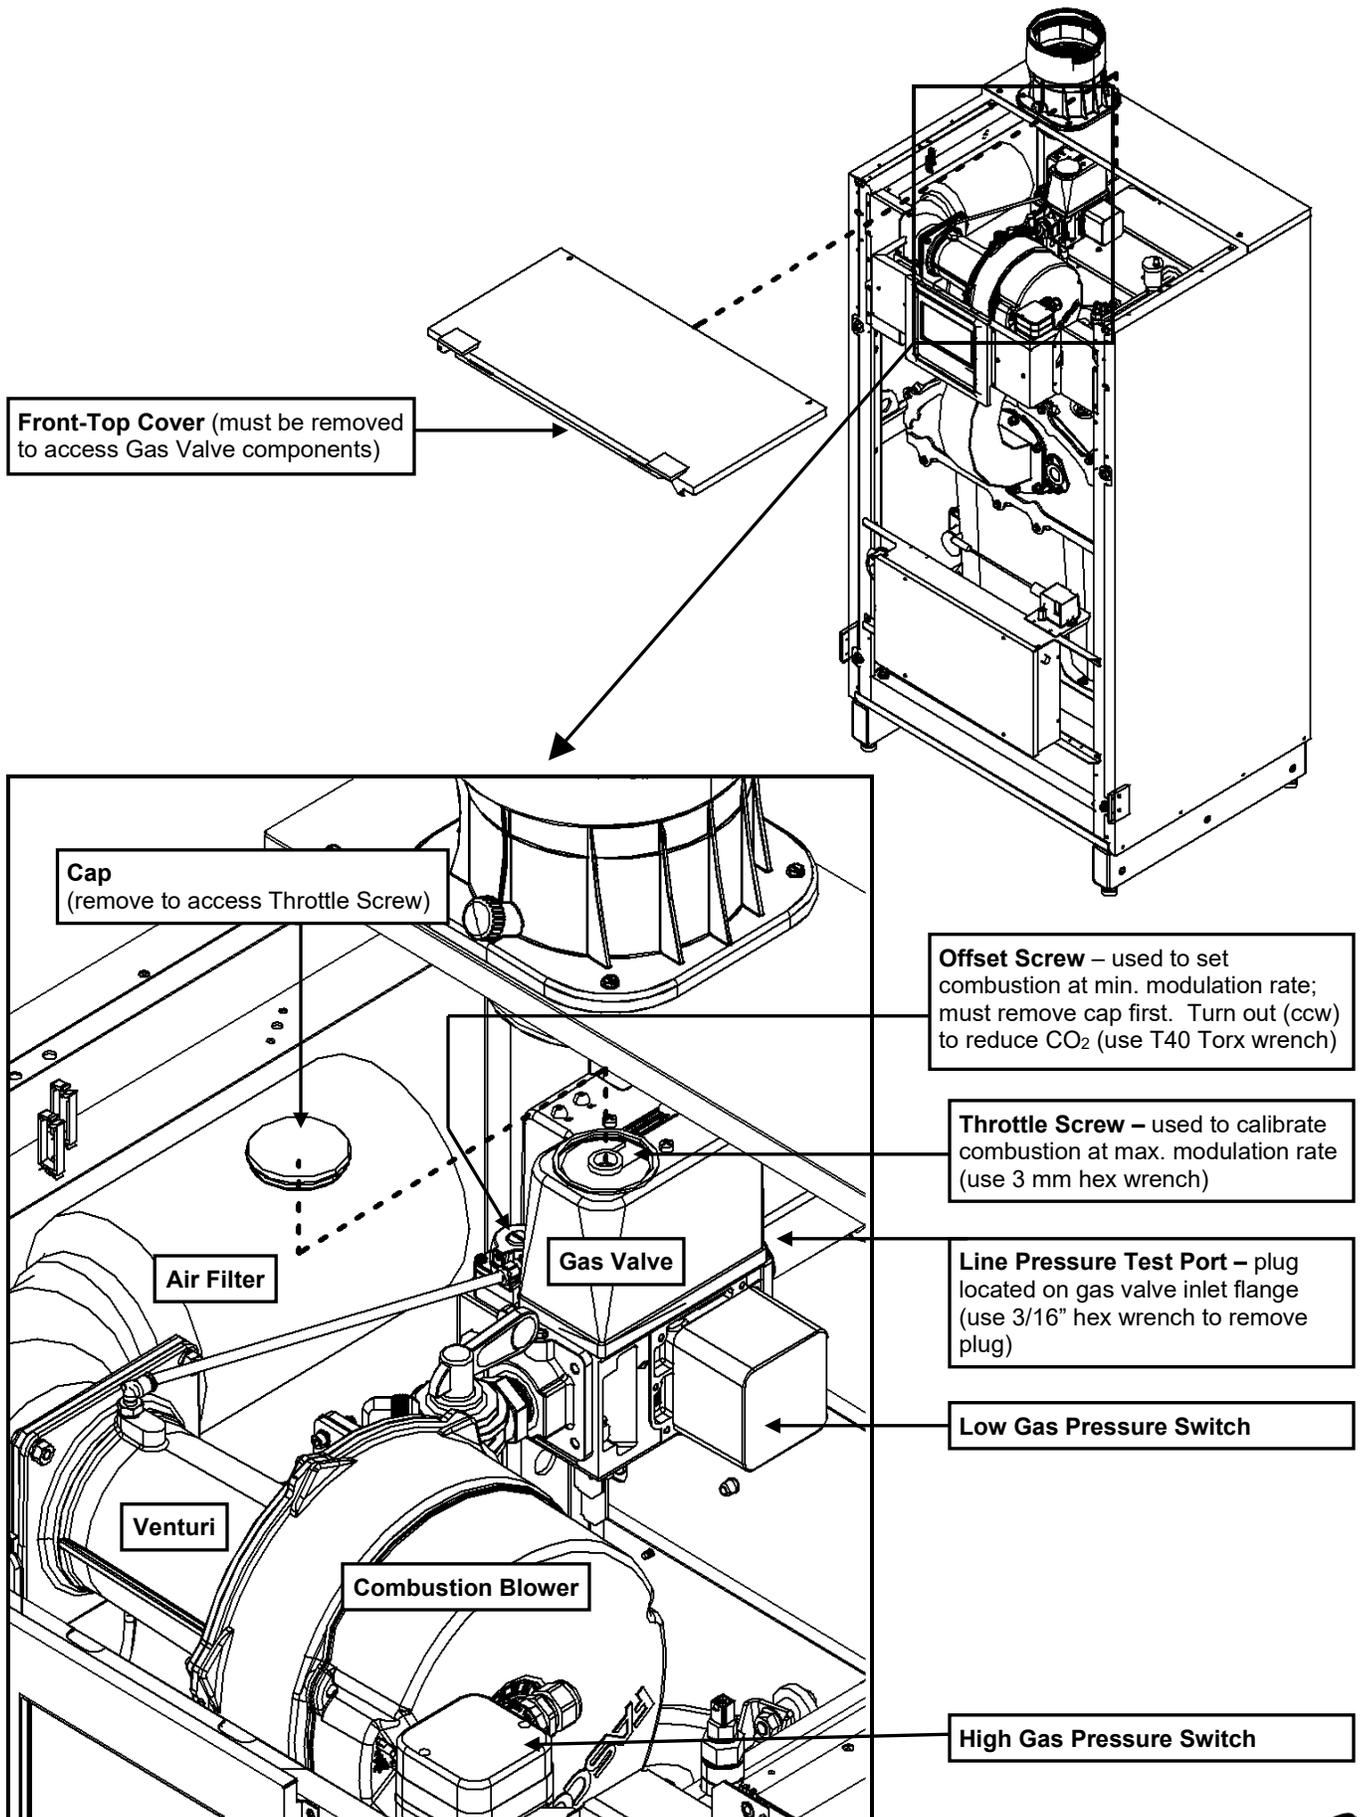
(b) Gas Valve Assembly (FTG 2000-2400)
